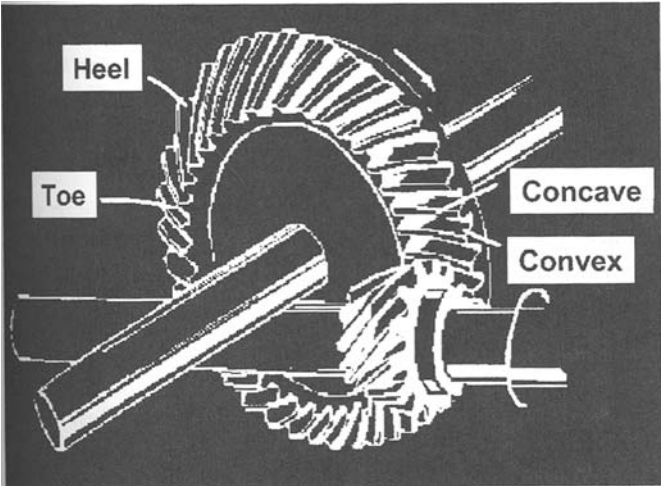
Hypoid gears. (Courtesy of Lubrizol Corp.)
